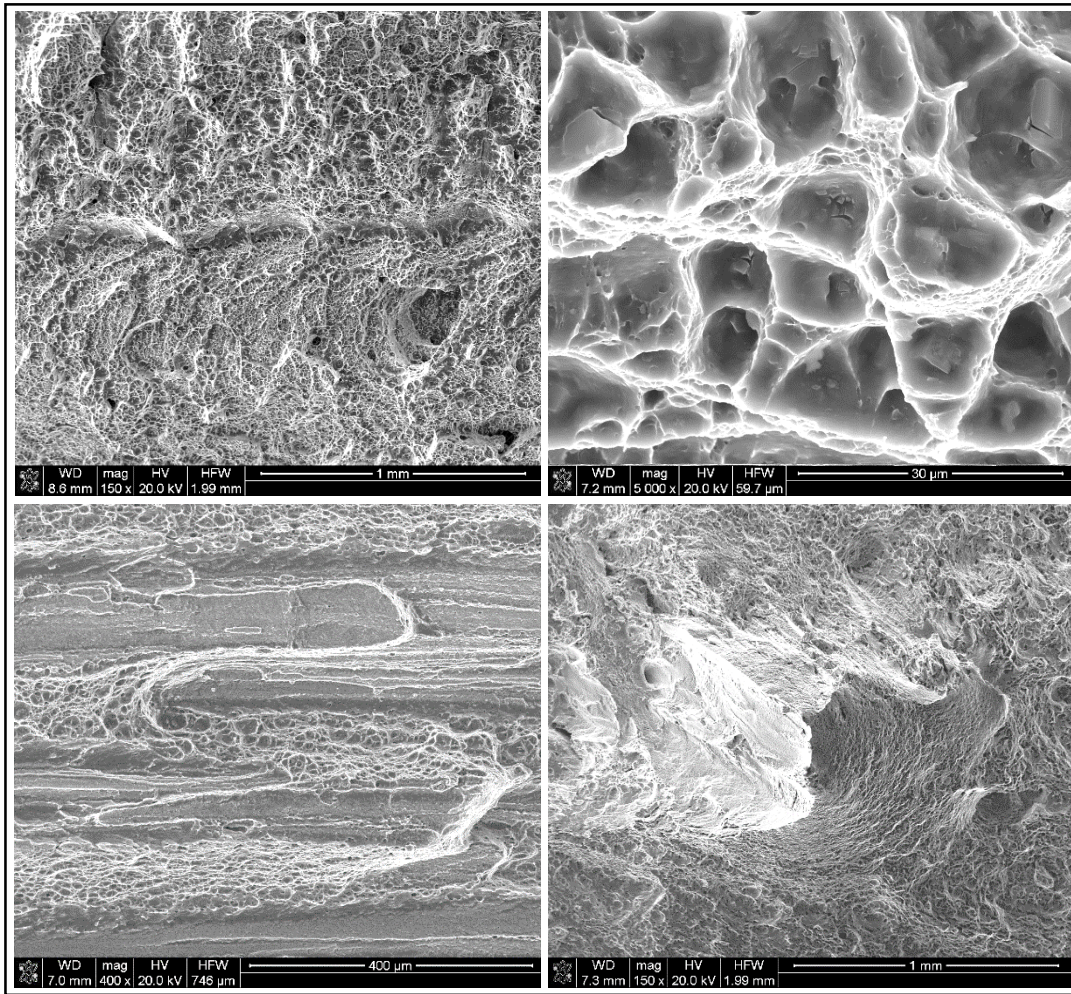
Fracture surface of FSPed weldment (fracture toughness test).
